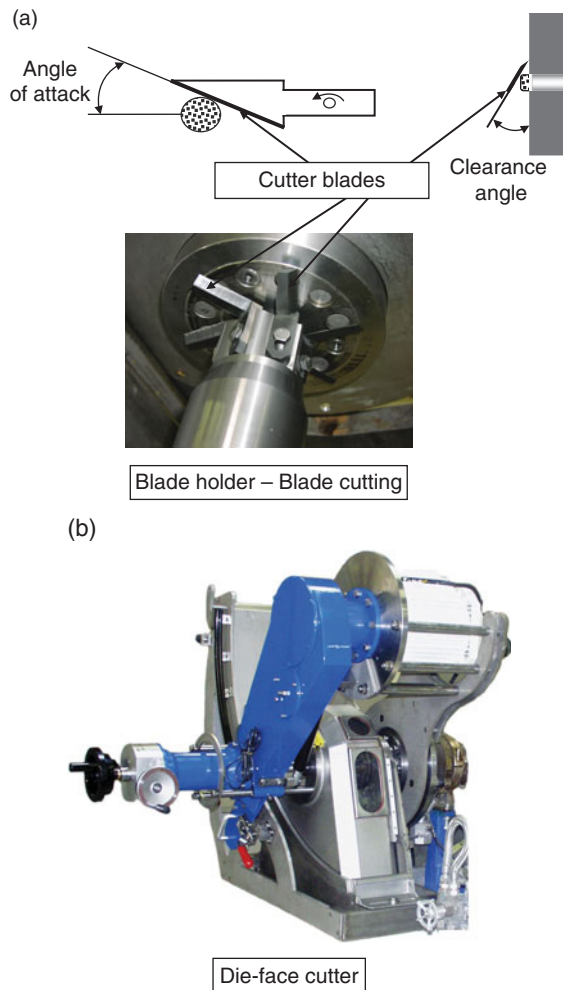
(a) A typical blade holder and sketches of blade cutting. (b) A modern die-face cutter. Source: Reproduced with permission of Clextal, France.
